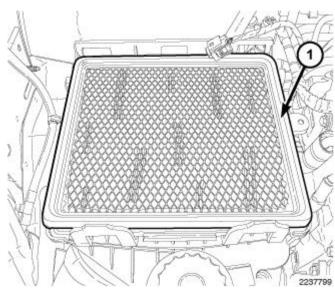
Intake Air Housing Cover Courtesy of CHRYSLER LLC
